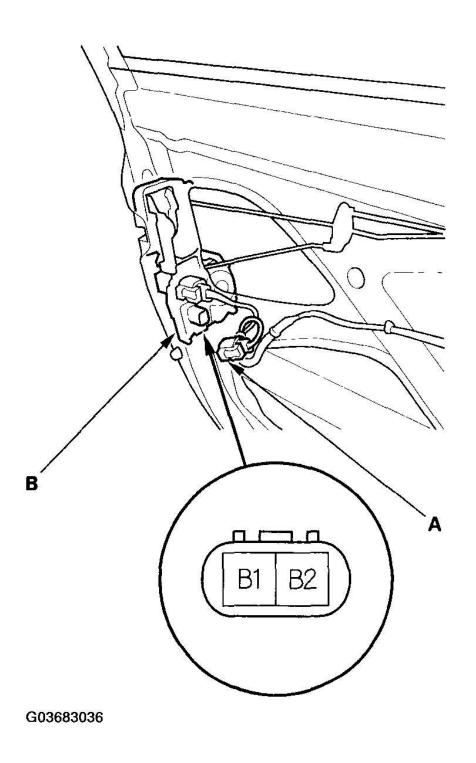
Disconnecting 2P Connector From Actuator Courtesy of AMERICAN HONDA MOTOR CO., INC.
